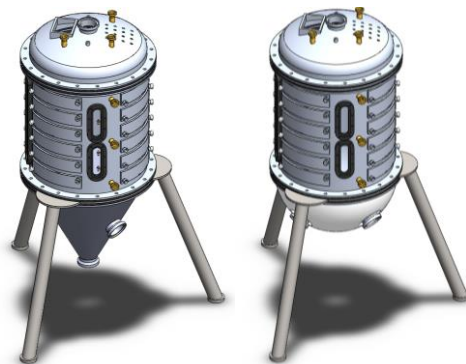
Fermentation tank with conical bottom shape (left) and hemispherical bottom shape (right)
